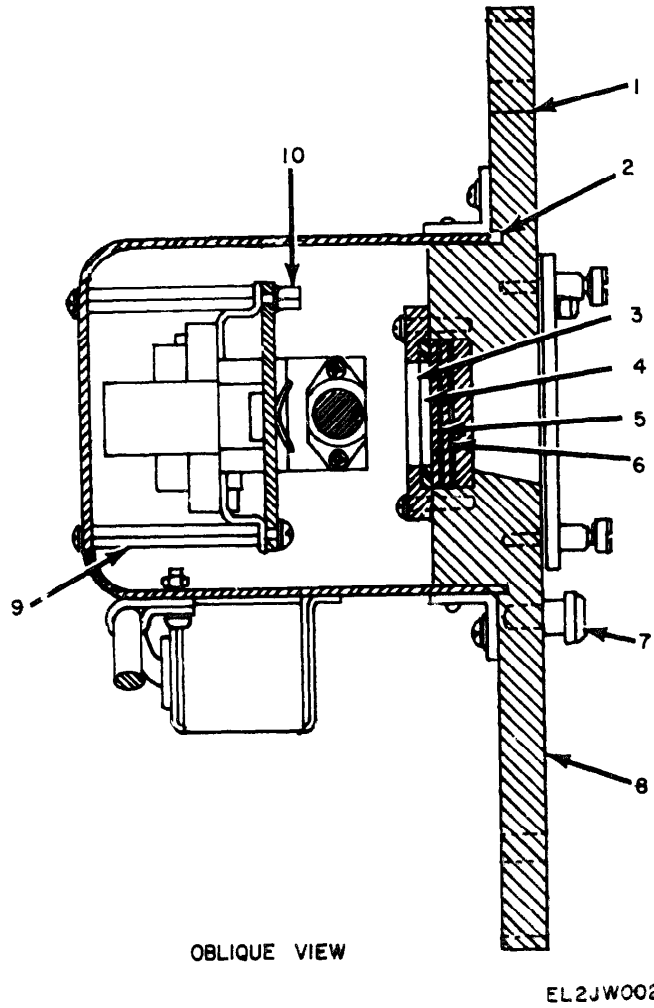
CRT Simulator Optical Alignment Target (Sheet 1 of 2).
